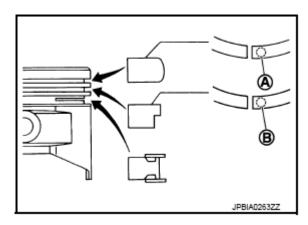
Identifying Stamped Mark On Top And Second Ring Courtesy of NISSAN NORTH AMERICA, INC.
